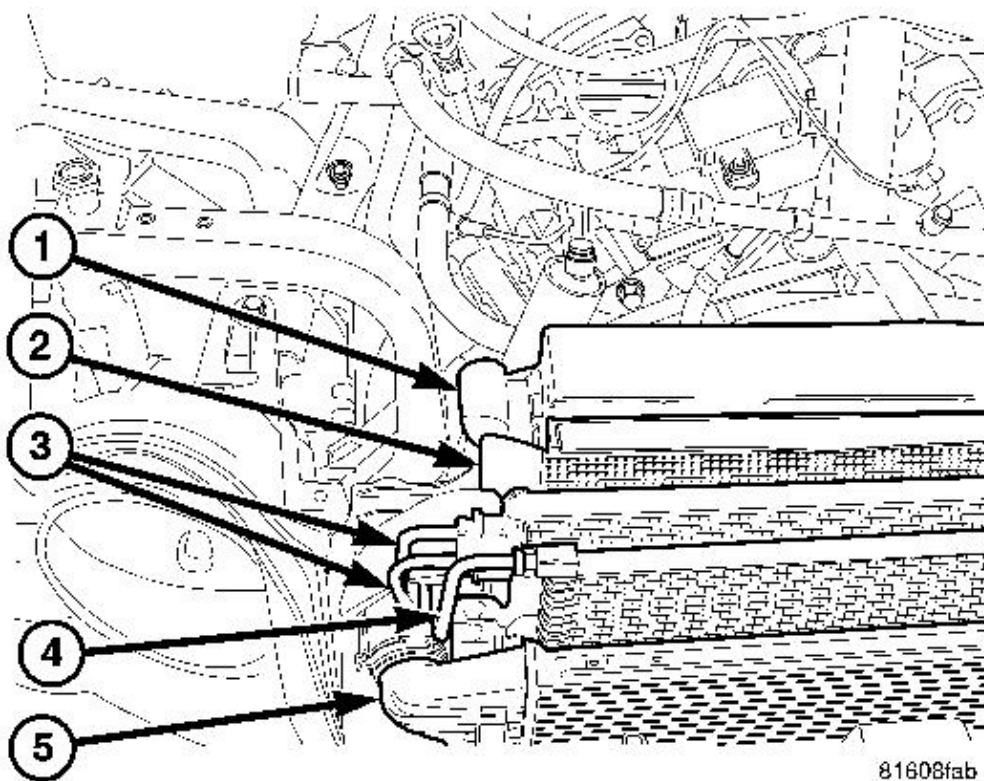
Radiator, A/C Condenser, Transmission Cooler, Power Steering Cooler & Charge Air Cooler
